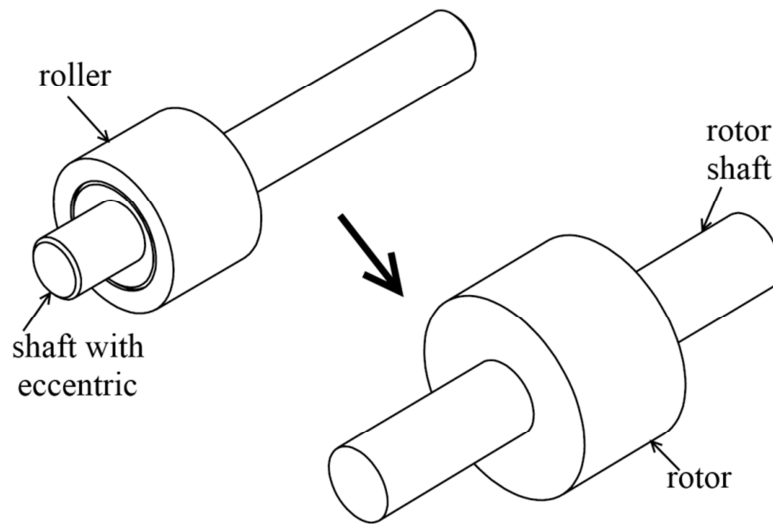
Merging the roller and the eccentric as one component – rotor
